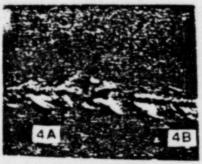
inches wide by 12 inches long by 3/8 inch thick ASTM A36 steel was used to produce bead on plate test samples. The test weldments were deposited along the 12 inch direction, employing AWS E7018, 1/8 inch diameter electrodes in the horizontal (2G) position. Weld undercut was additionally enhanced by orienting the welding electrode 10° from the horizontal plane. Three weld test panels were produced per the above electrode orientation at 140 amperes, these conditions selected to produce severe undercut. An additional two test panels were produced using weld conditions which would eliminate or reduce substantially the degree of undercut. These test welds were deposited with 120 amperes.
